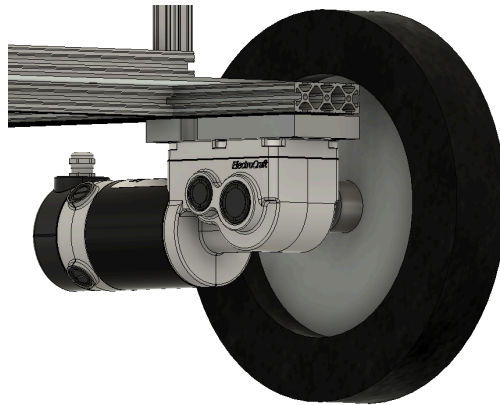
Wheel and motor attachment and orientation. Drawing created in Autodesk Fusion.
